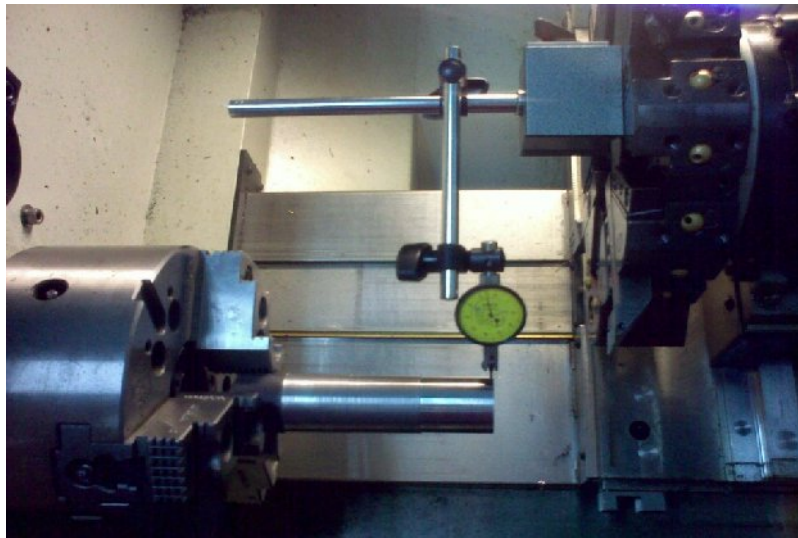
The dial gauge with magnetic stand attached to CNC machine and the workpiece is clamped at the chuck.
